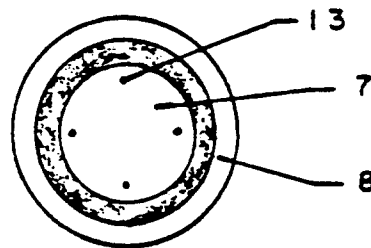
VIEW OF THE OUTSIDE SURFACE OF THE NOZZLE COVER
